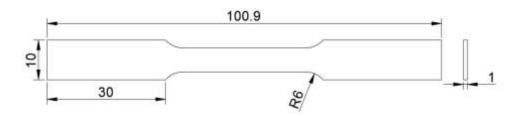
Dimensions of the dog-bone shaped tensile specimen (Unit: mm).
